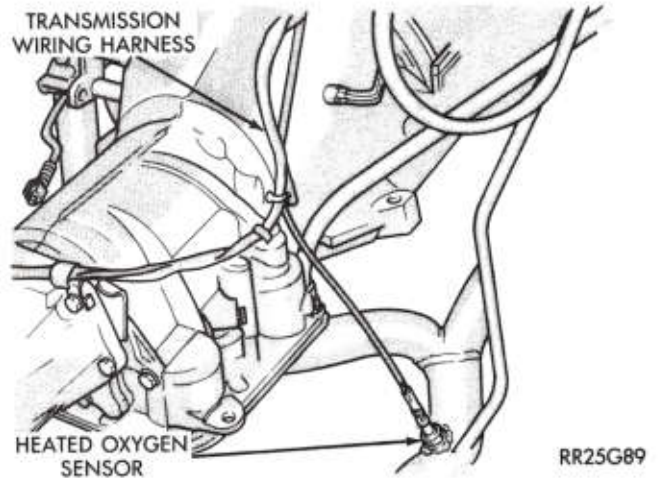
Heated Oxygen Sensor Location 3.9L Engine
